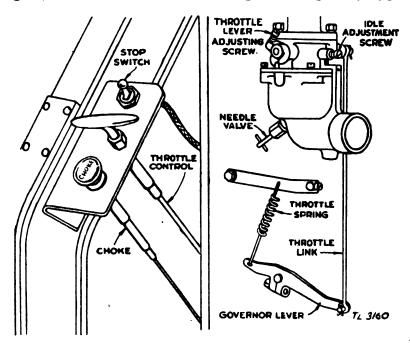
Carburetor, governor, and manual control mechanism.
